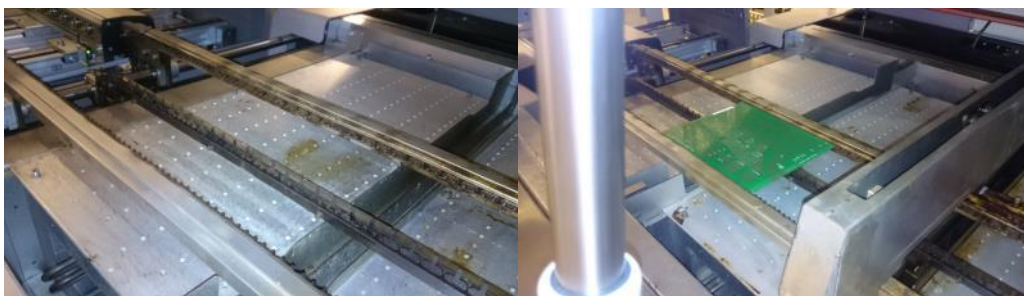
Reflow oven conveyor with board support, without board (left) and with board (right).
